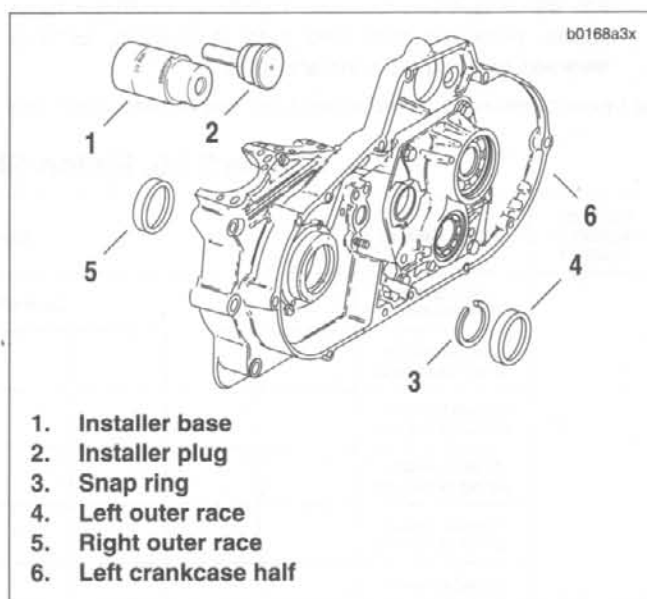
Installing Sprocket Shaft Bear Outer Races
